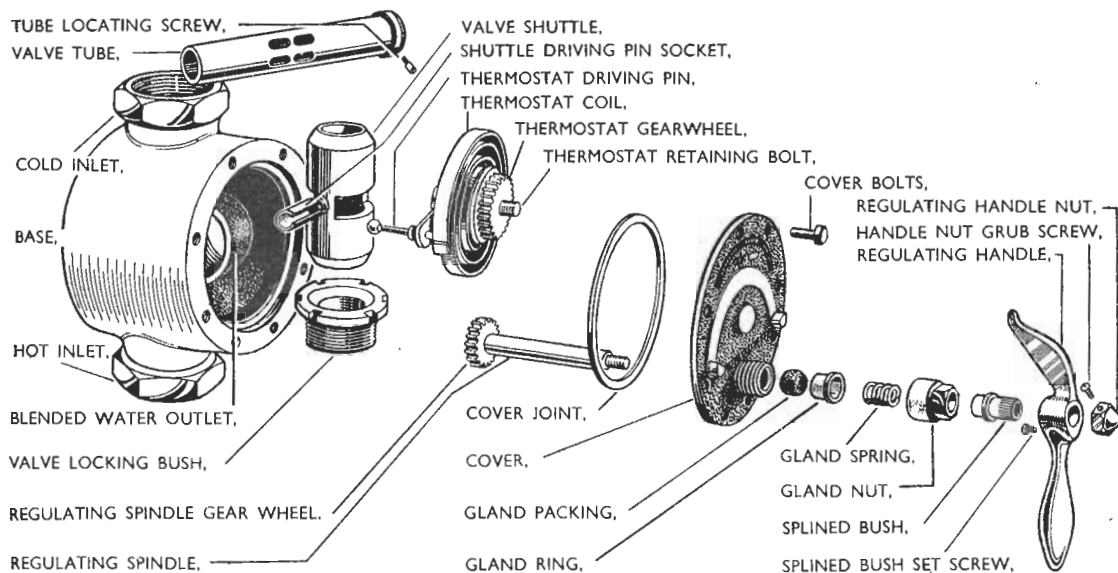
Exploded view of thermostatic steam and water mixing valve.
